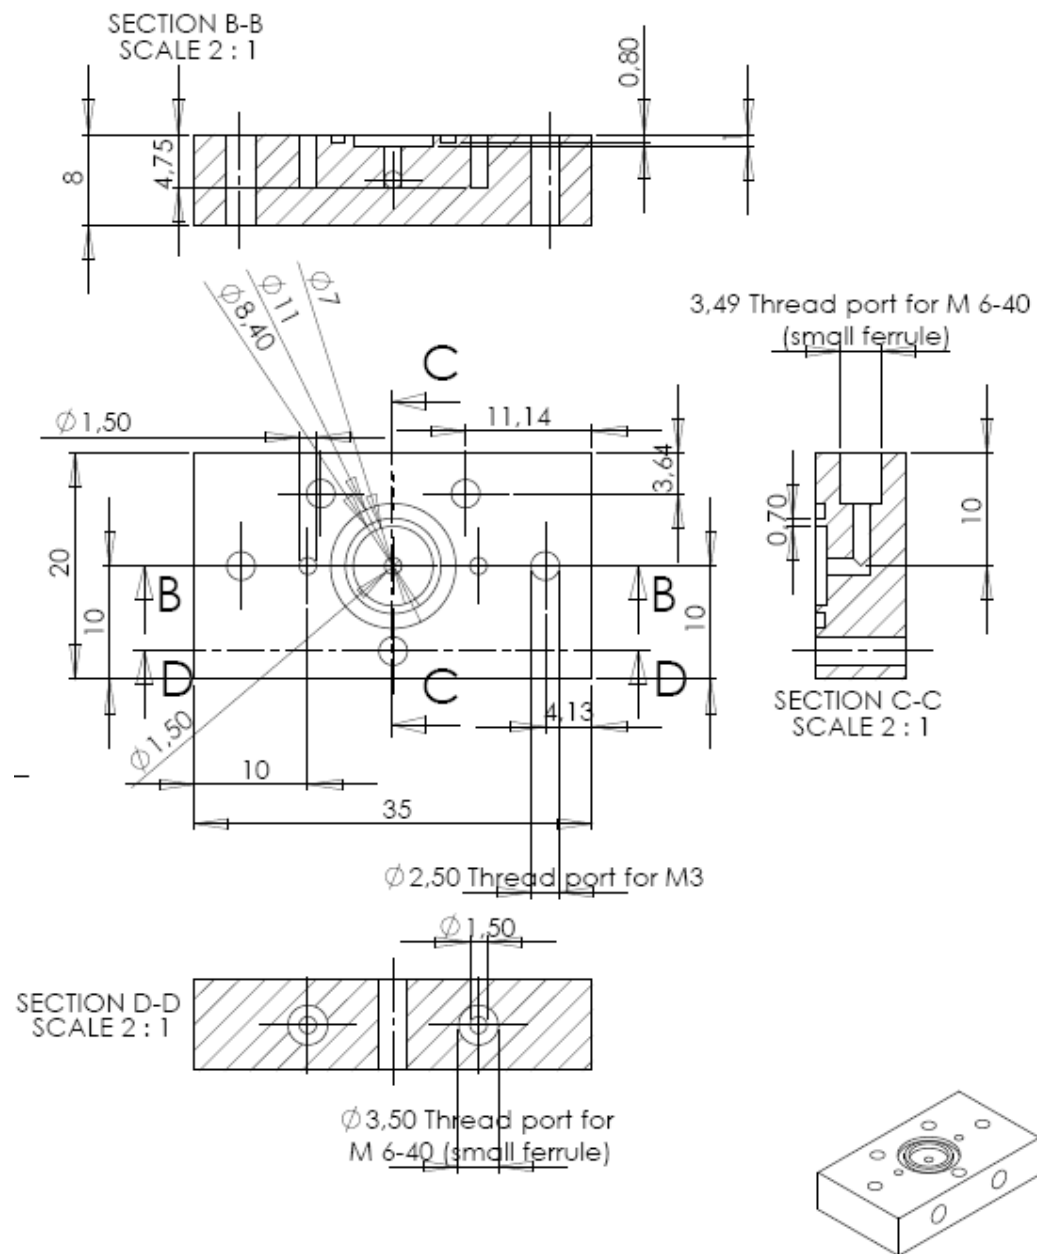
Membrane microbio reactor prototype - top PMMA layer
